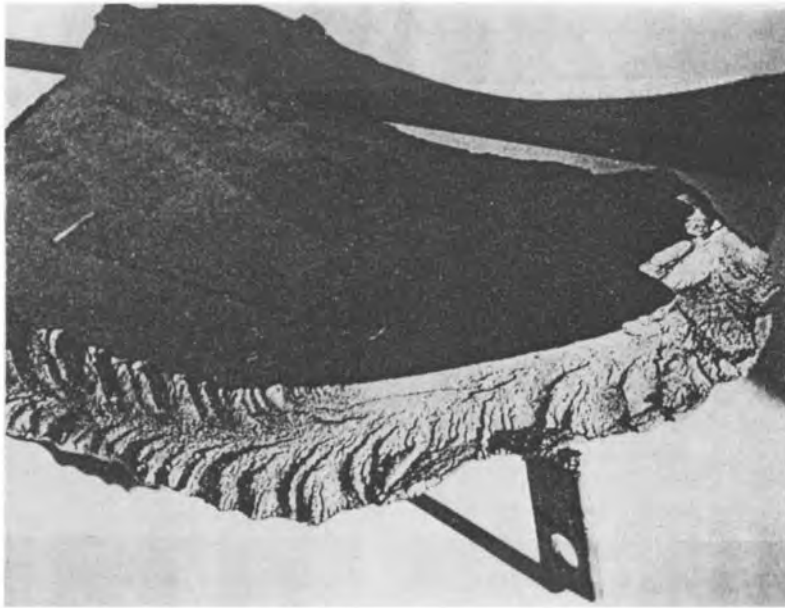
Fragment of a thick-wall fractured drum. The fracture, which started at the right side of the photo, ran rapidly to the left, resulting in a well-defined chevron pattern. Source: Ref 7
